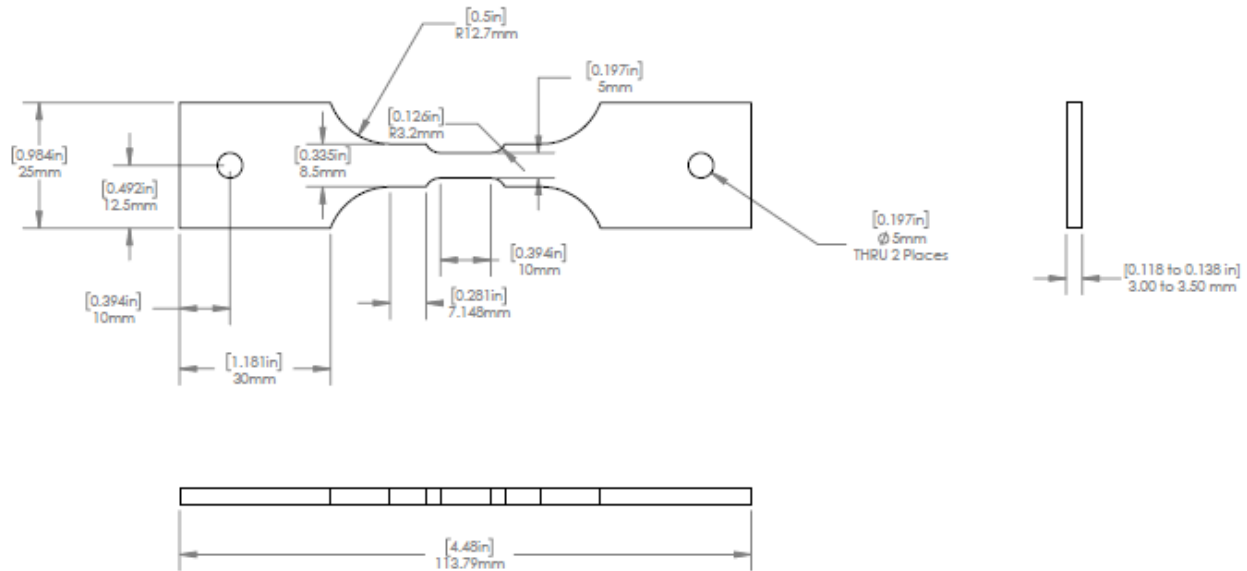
Specimen dimensions for Gleeble-based mechanical testing.
